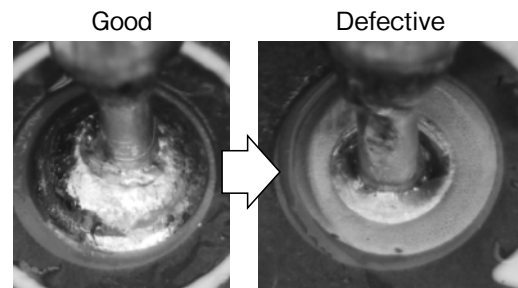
Example of Insufficient Solder Finishing in Through-hole
